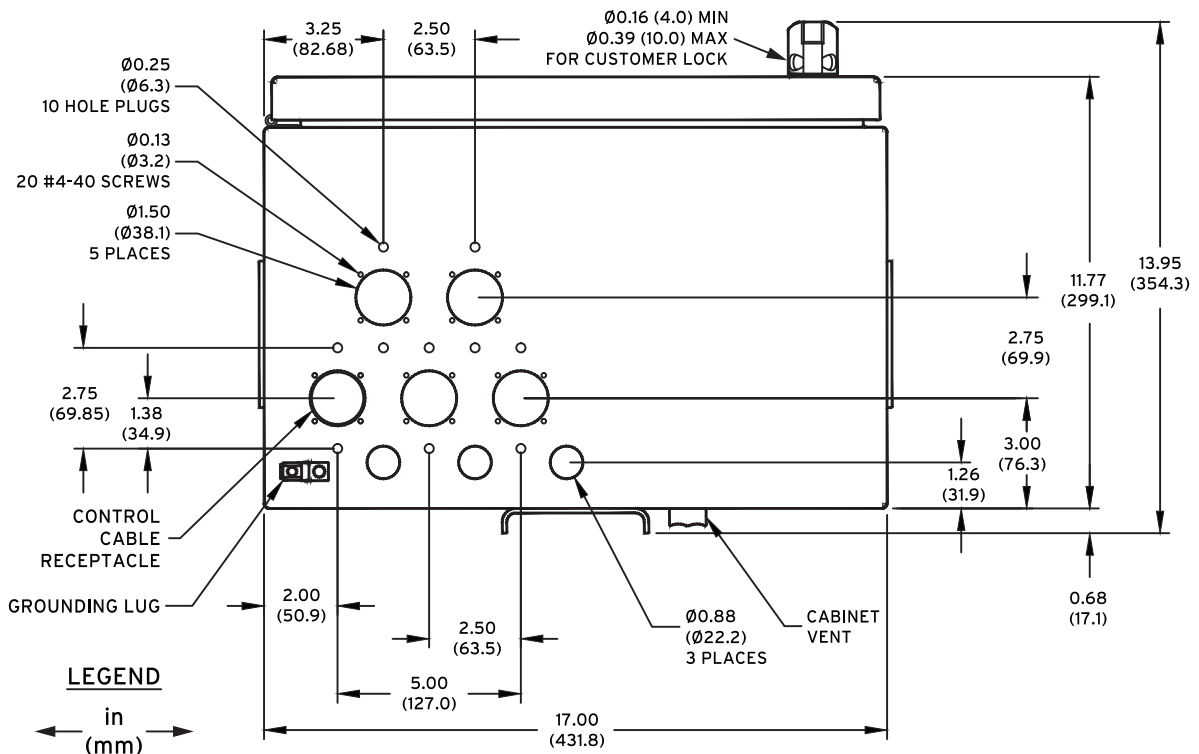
SEL-651RA Grounding Lug Location and Other Dimensional Information (Bottom View)
